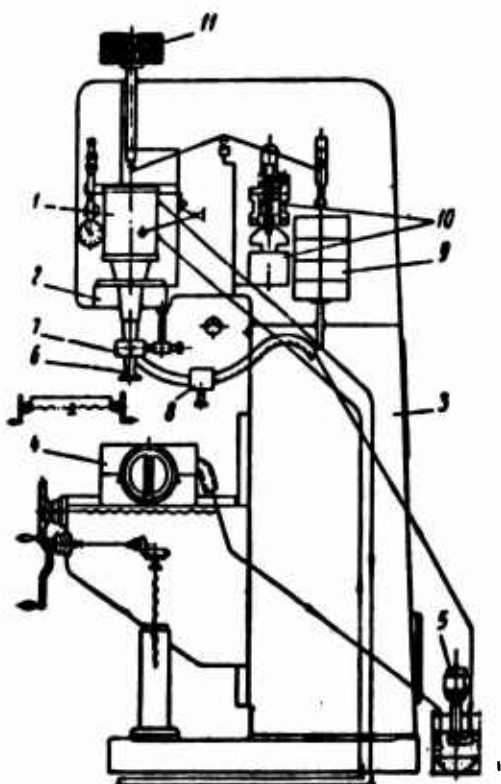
Diagram of device of universal ultrasonic machine for treatment of hard and brittle materials: 1 - converter; 2 - carriage; 3 - frame; 4 - table with bath; 5 - pump system; 6 - tool; 7 - annular shower for suspension; 8 - hose with valve for adjustment of suspension supply; 9 - balancing load; 10 - electromagnet with oil shock absorber; 11 - operating loads.
